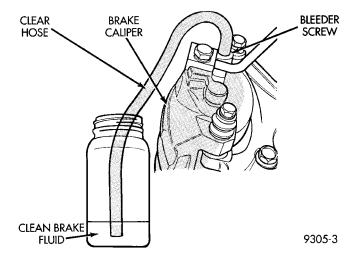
Proper Method for Purging Air From Brake System (Typical)
